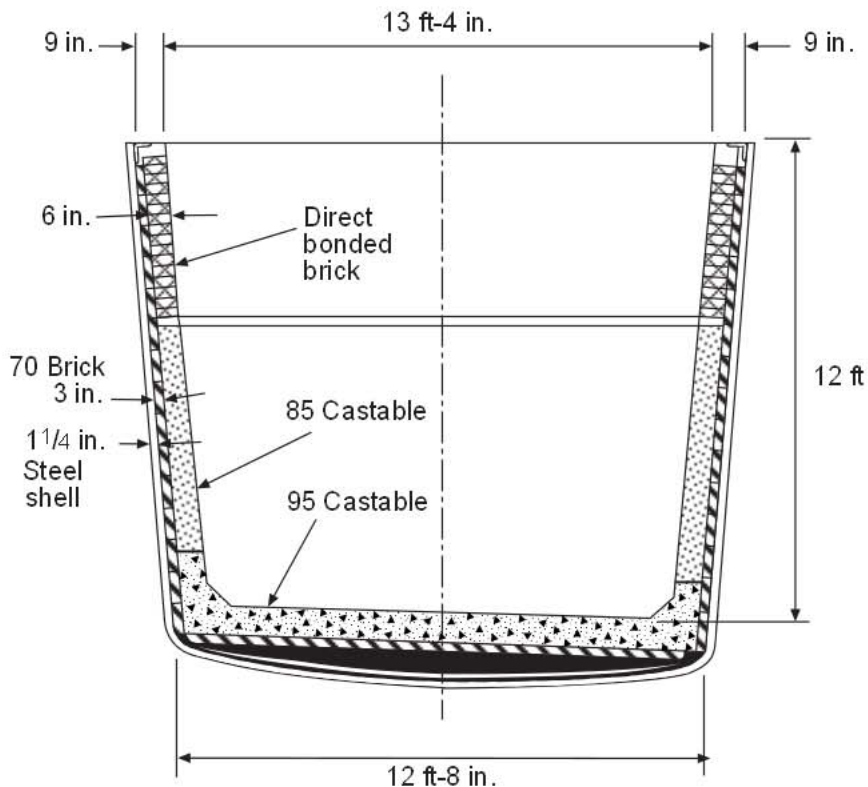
Lining in a caster ladle using a castable barrel and bottom.
